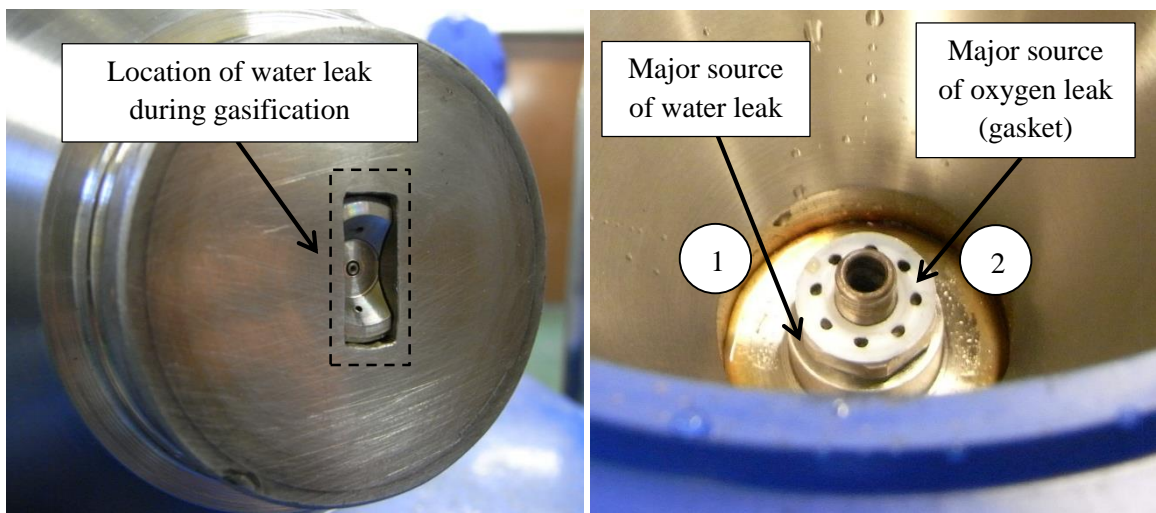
Images showing the location and major source of leaks on cooling jacket assembly
